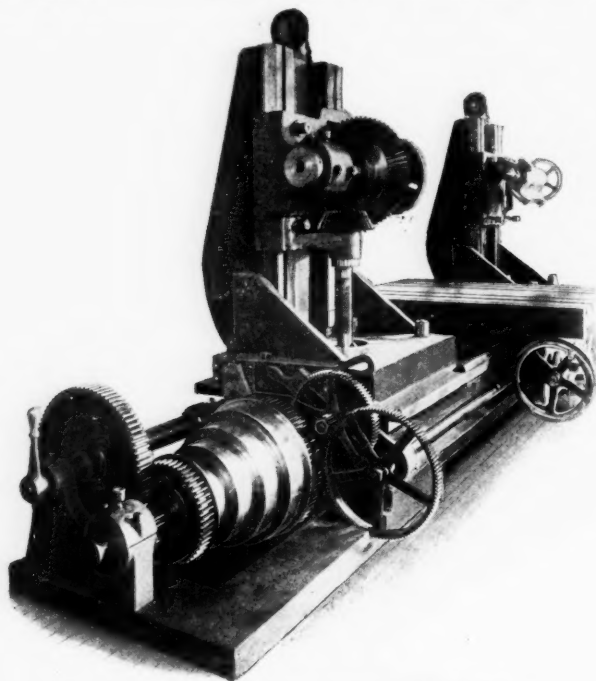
Driving Mechanism of New Haven Boring Mill.
